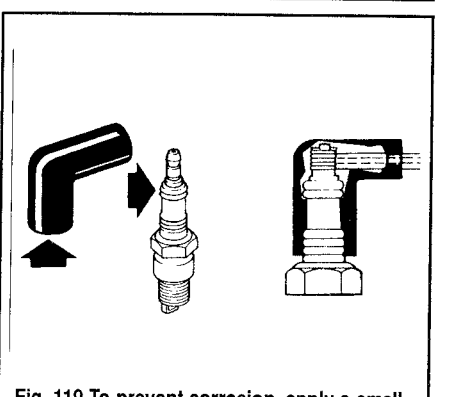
To prevent corrosion, apply a small amount of grease to the plug and boot during installation
